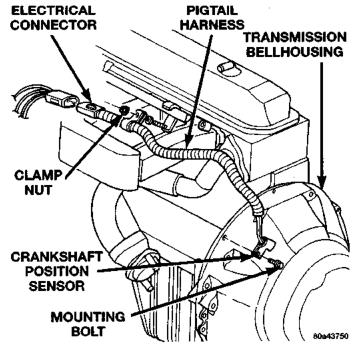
Crankshaft Position Sensor—4.0L 6-Cyl. Engine—Auto. Trans.
